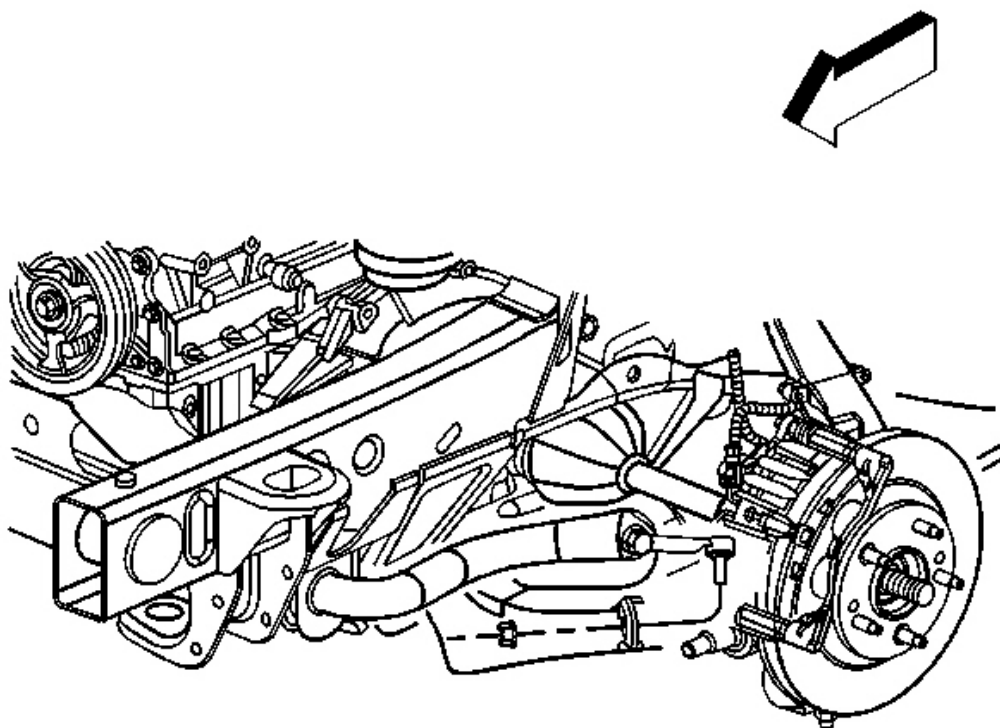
View Of Stabilizer Shaft Link Lower Retaining Nut
